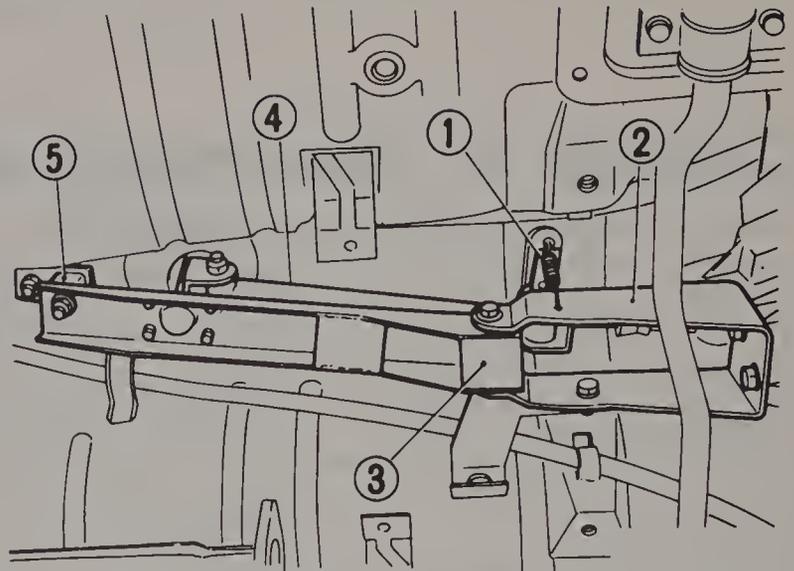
2WD shifter (under vehicle) component location (Sec 4)
